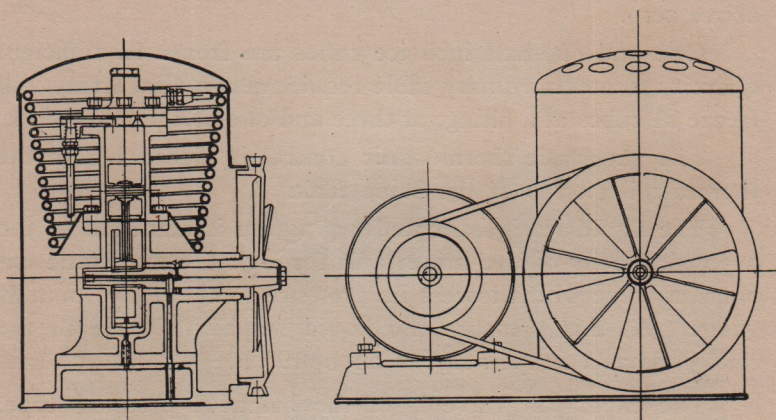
KOLD KING REFRIGERATING MACHINE.
